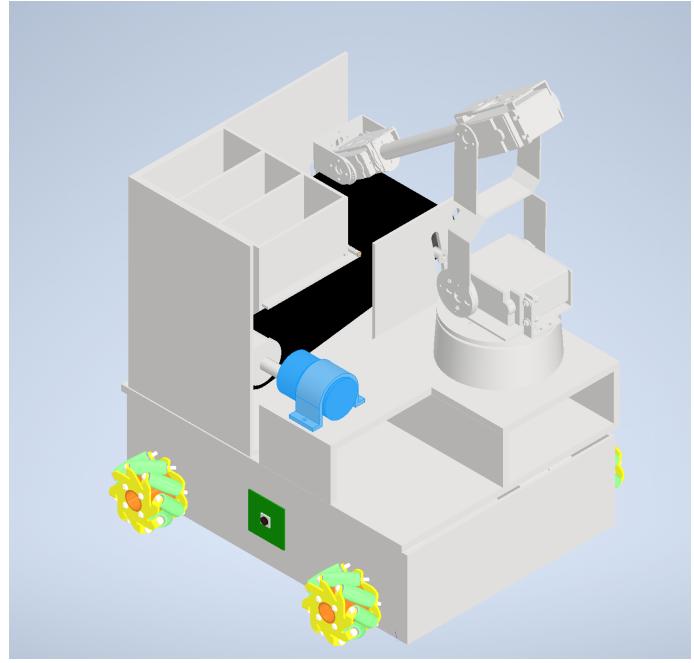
Shooting mechanism driving motor with mounting bracket.
